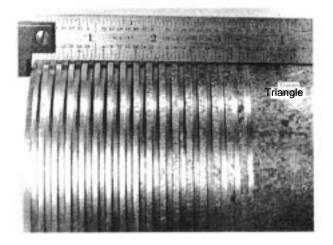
Full-Crested Threads and Triangle Stamp Measurement on a Buttress Thread Pin
